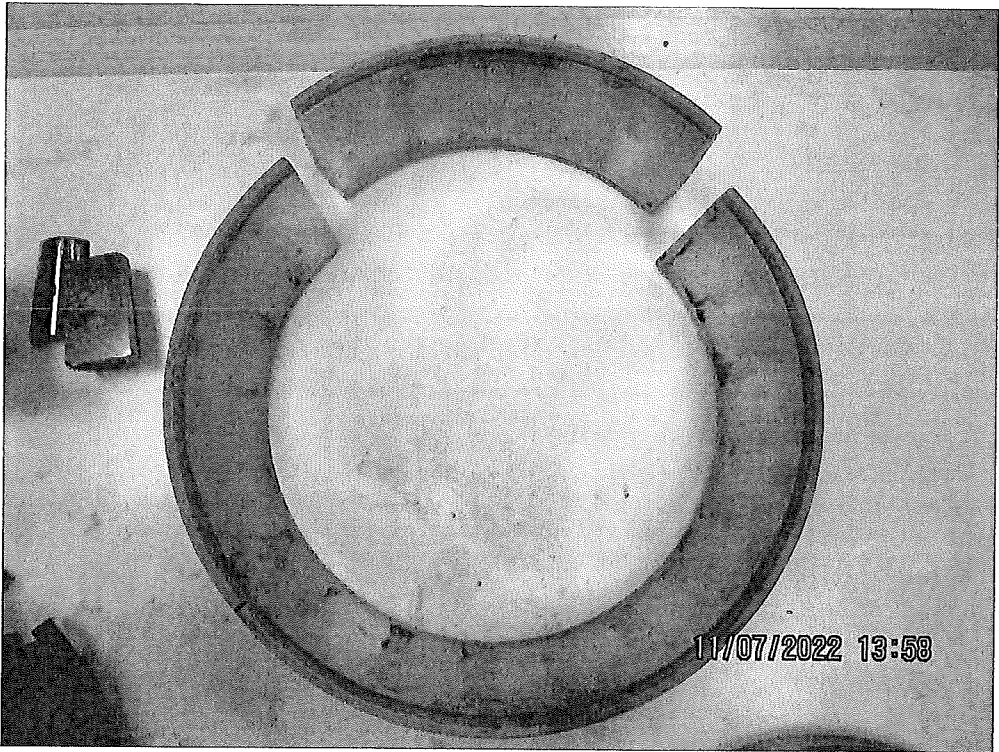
Close-up of a cover after mild cleaning which showed localized corrosion at roller locations.
